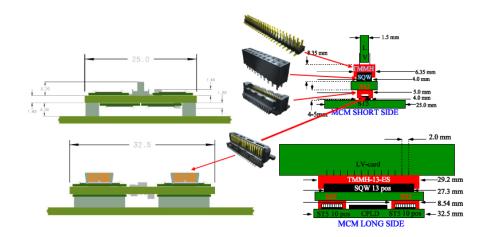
Side views of the MCM-board assembly including an adaptor board.
